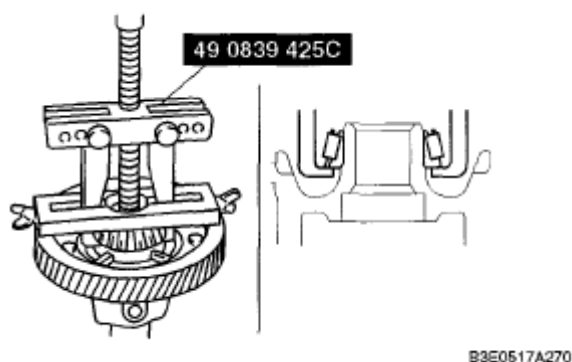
Removing Bearing (Ring Gear Side) From Gear Case Using SST
